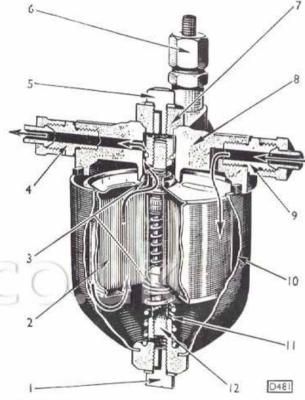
Section of fuel filter (C.A.V.)-paper element
